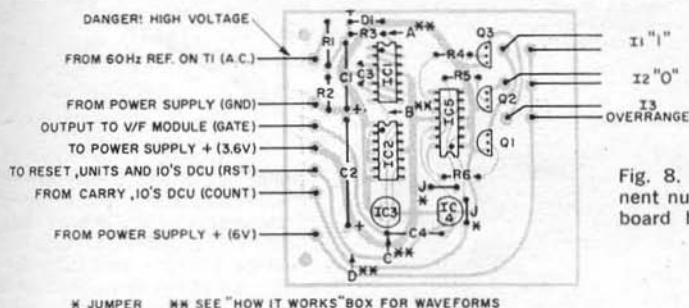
Double and triple check component numbers, values, and orientation on board both before and after soldering.
